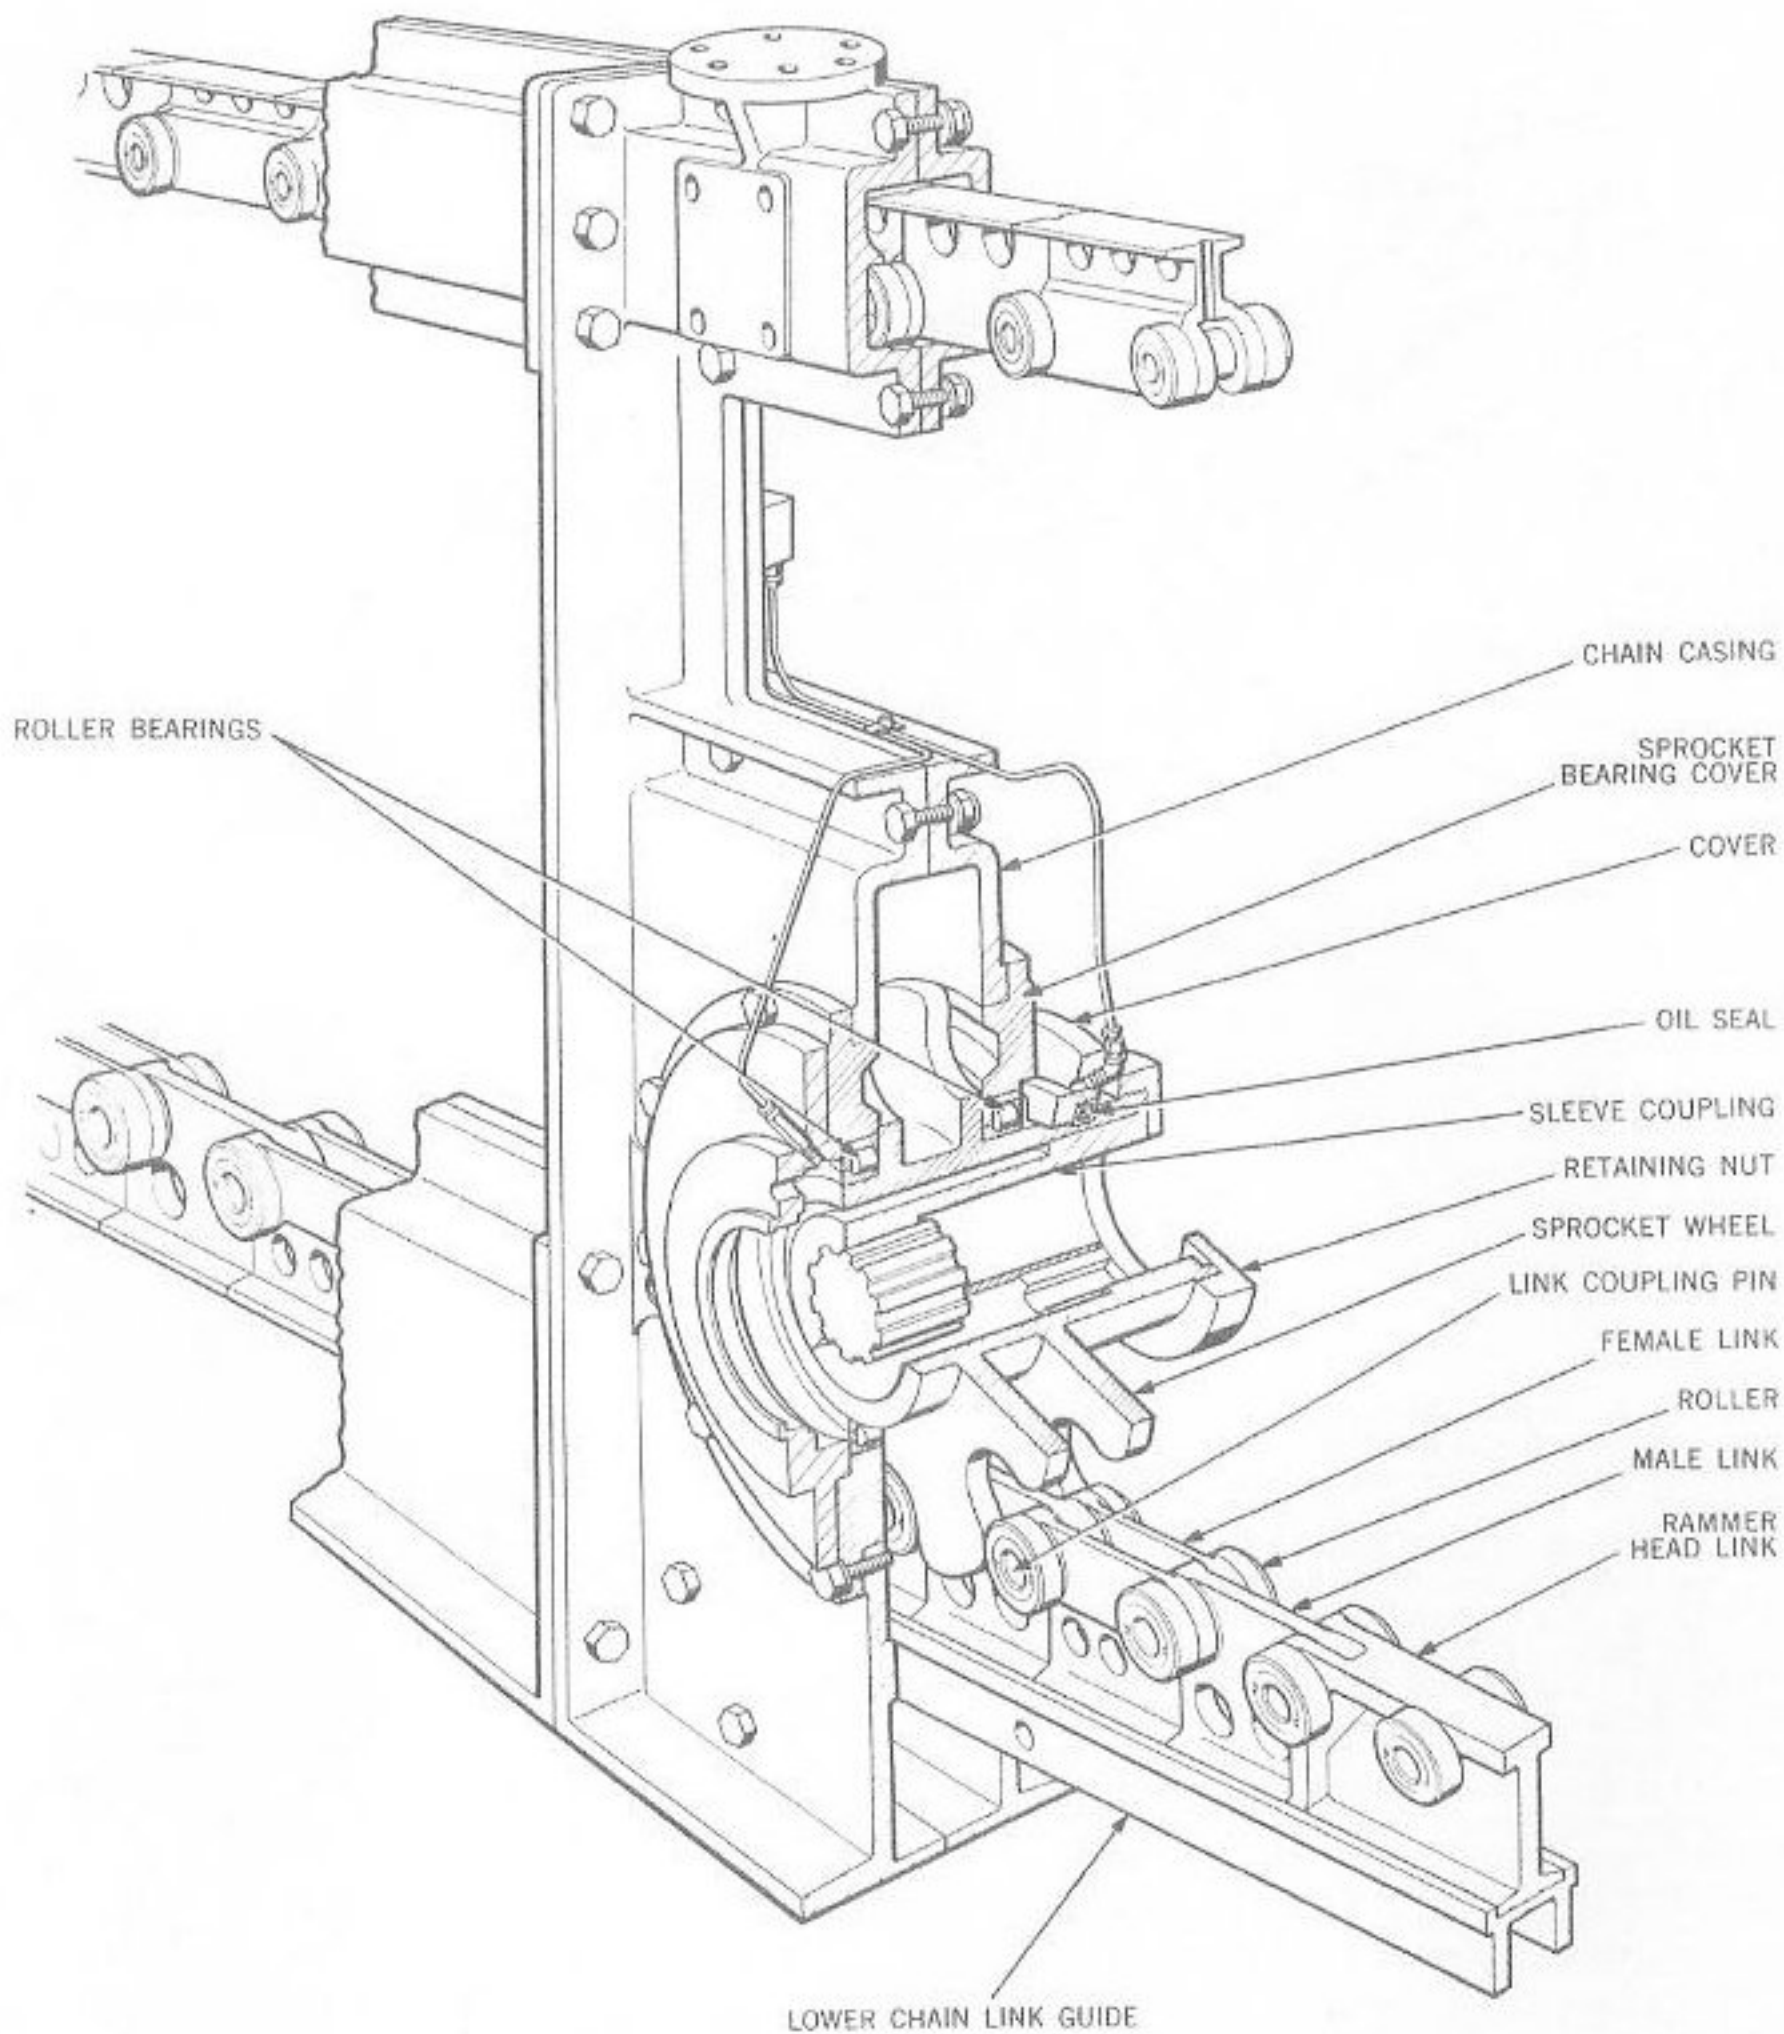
Rammer Sprocket Coupling, Sectional View
